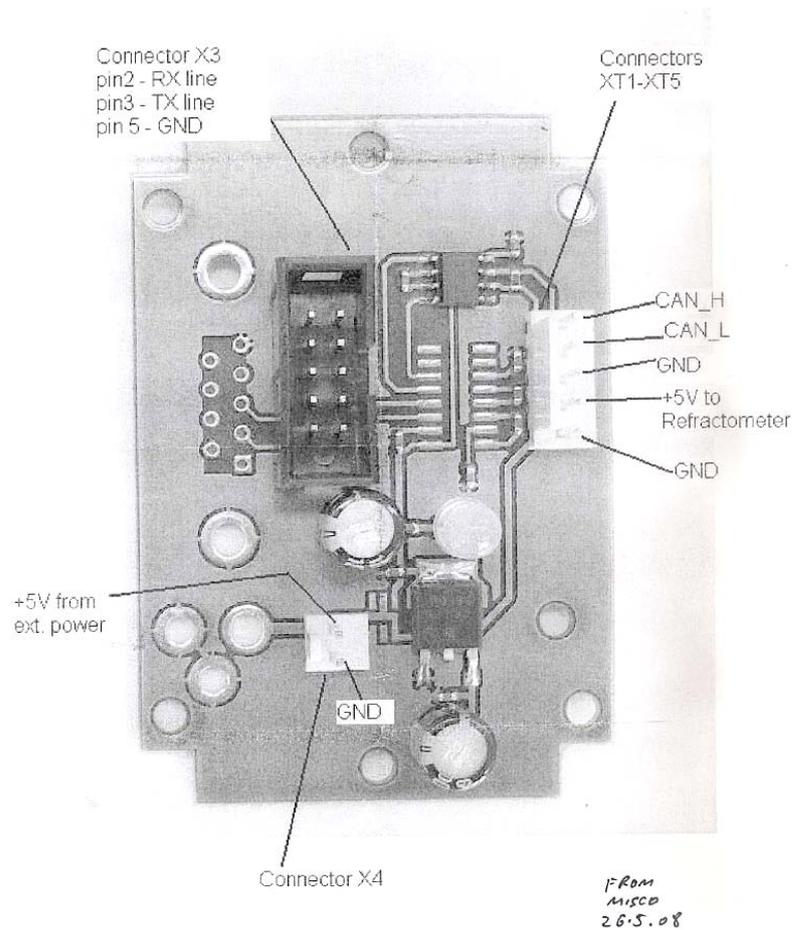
Photo of In-line CAN-RS232 PCB supplied by MISCO
